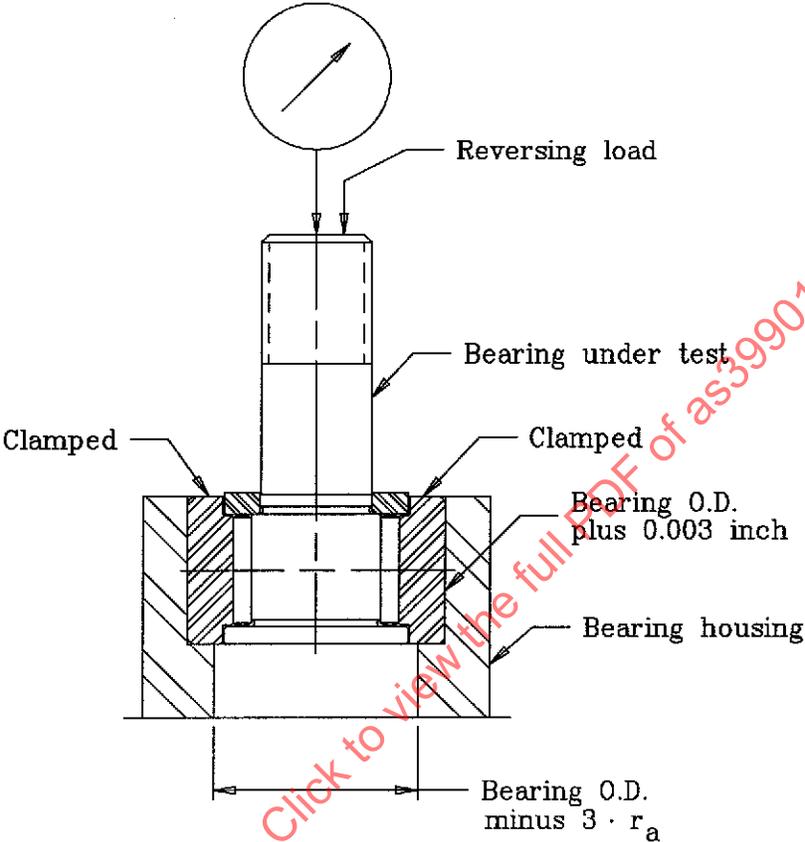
A - Axial Internal Clearance Test for Type VII, VIII, and IX Bearings
